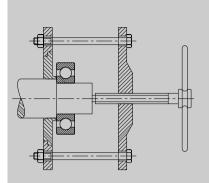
Dismounting of Ball Bearing by using a Extraction Tool
